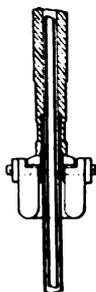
End view of Exhaust Valve Lever, Koerting.
